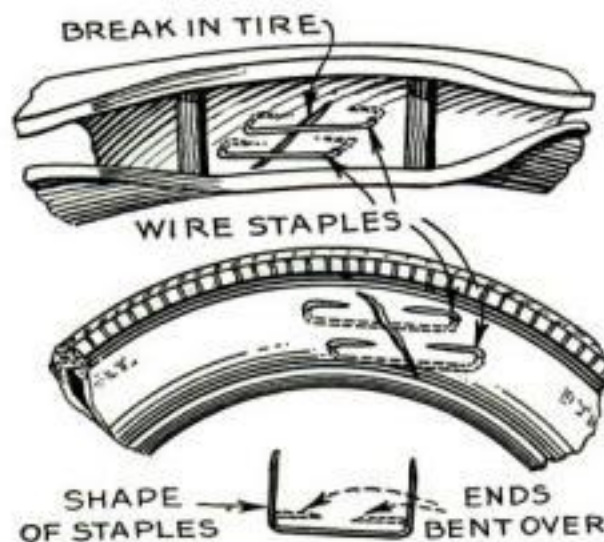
Holes cut by bottles in good tires can be mended by stapling the cut edges together
